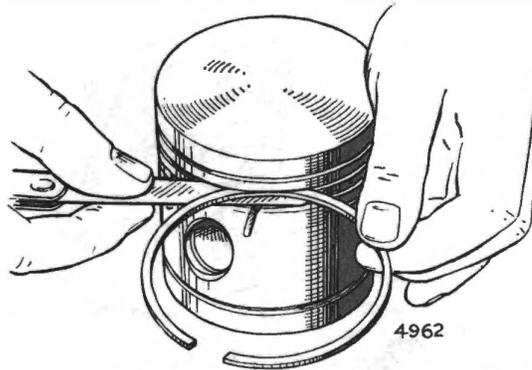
Checking piston ring side clearance (1494 c.c. piston shown)
